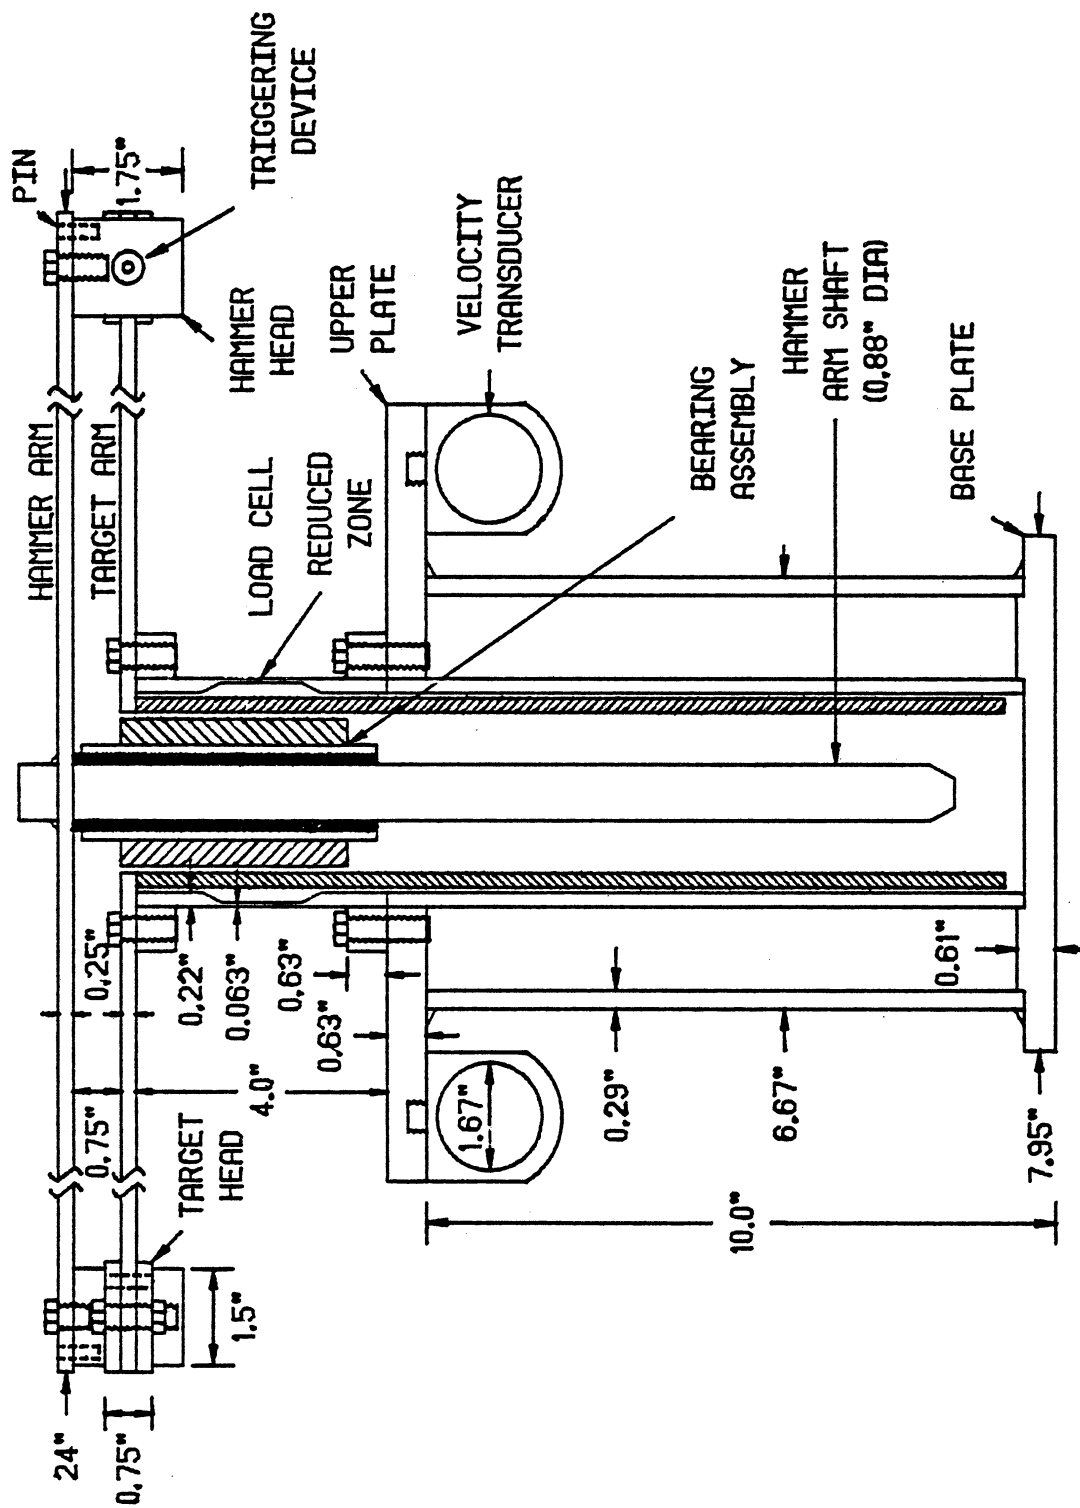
Cross Section of Assembled Footing and Impacting Device.
